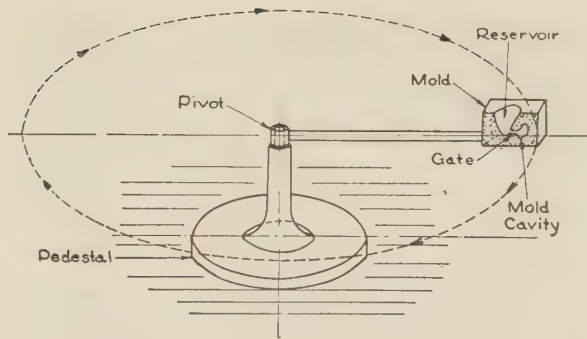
DENTISTS' INLAY-CASTING MACHINE, ILLUSTRATING CENTRIFUGE CASTING
